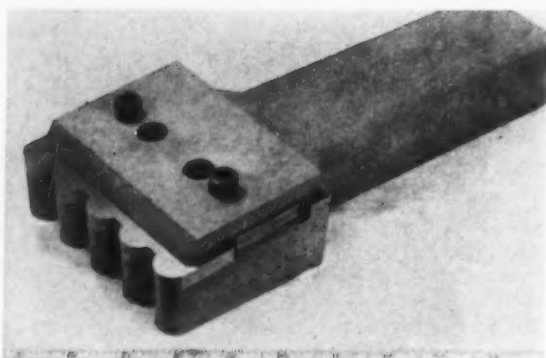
FINISHING TOOL FOR FORMING PASSES ON HARD STEEL-MILL ROLLS
